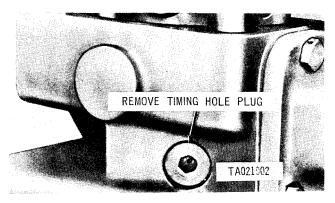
Removing or installing fuel injection pump timing hole plug.
